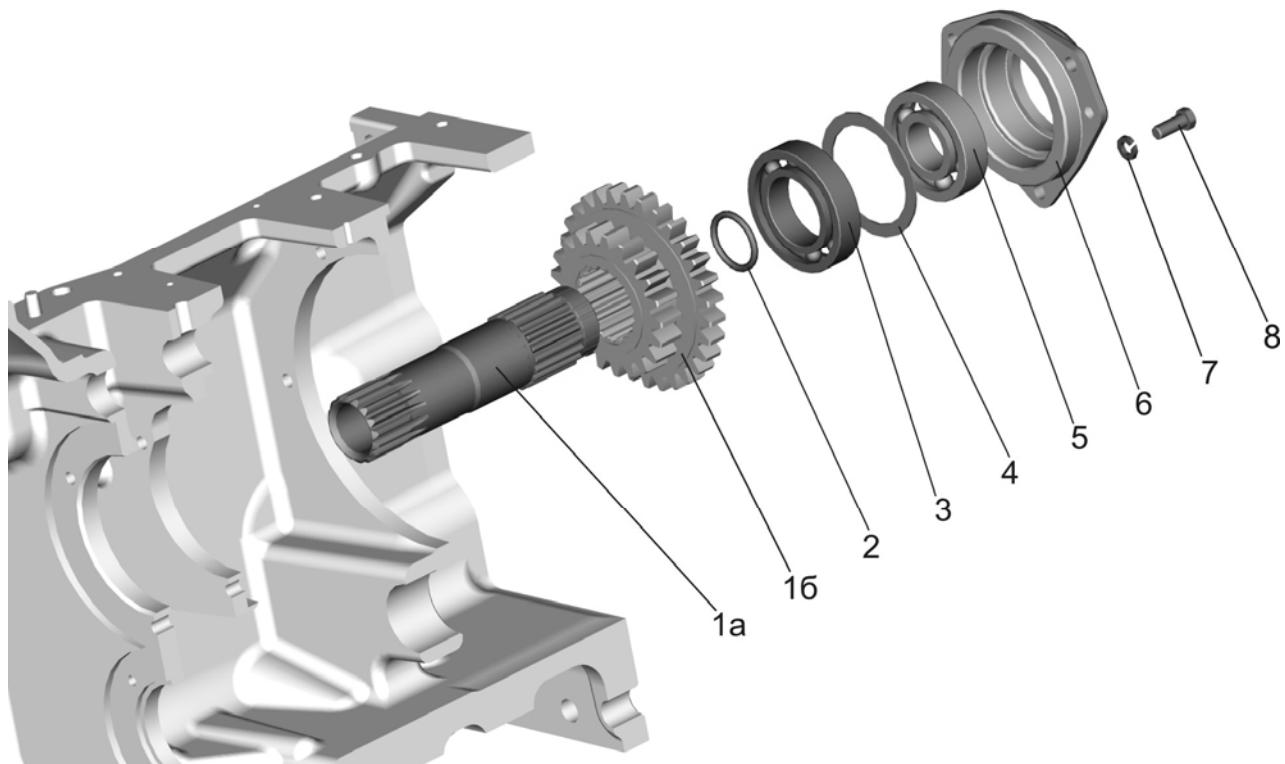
Clutch casing. PTO drive. ($n_{eng}=1800$ rpm)
